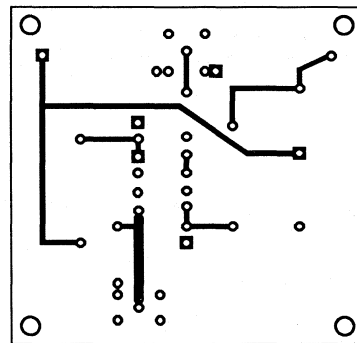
Solder Side (Bottom) as Viewed From Component Side (Top)
